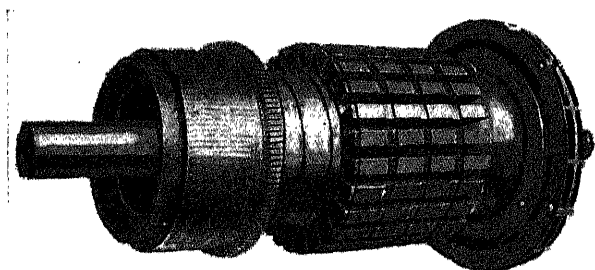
Armature of Railway Motor, Showing Ventilating Fan.
